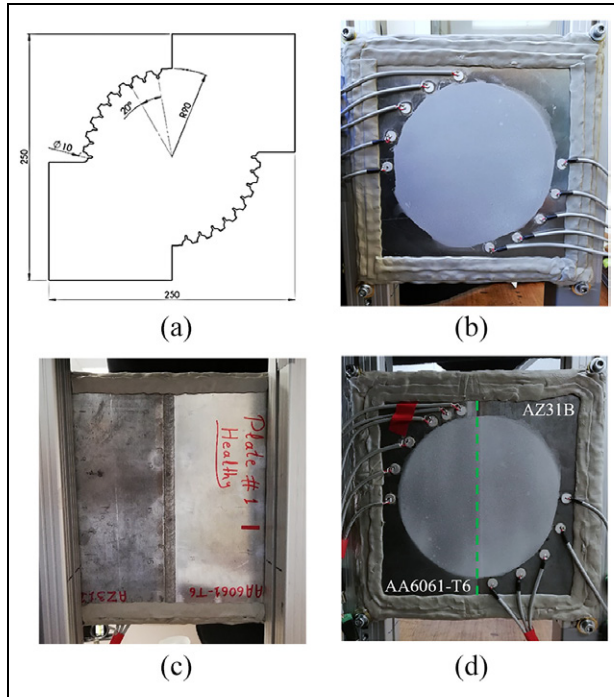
(a) A drawing of the template used for proper PZT placement (dimensions are in mm), and photographs of the specimens used in this study: (b) AA6061-T6 plate, (c) AA6061-T6/AZ31B plate's front-side, and (d) AA6061-T6/AZ31B plate's back-side.
